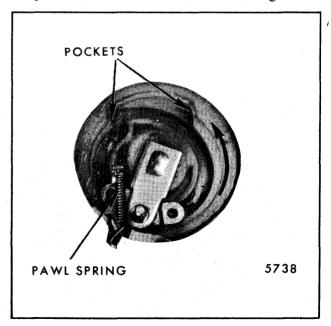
Drive and Lock Pawl Guide Pin Pockets
